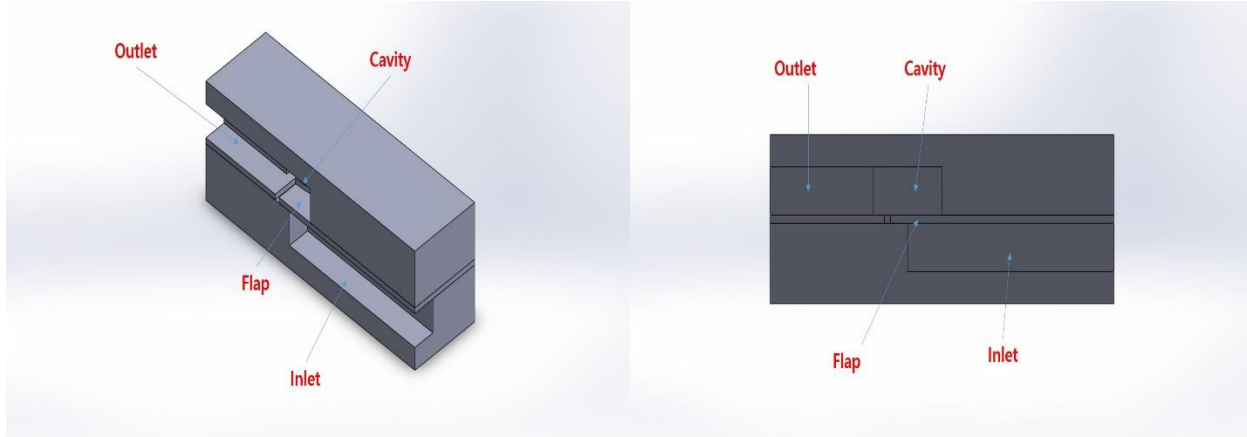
Check valve prototype design: (Left) Isometric view, (Right) Front view
